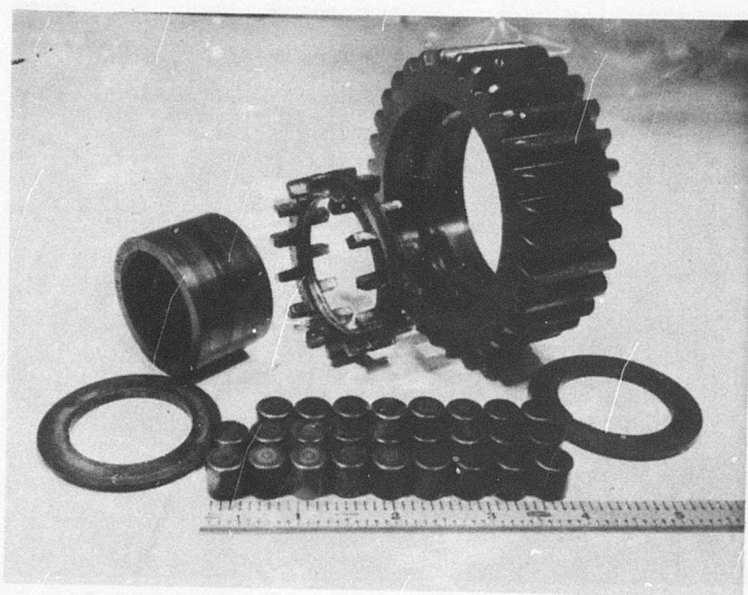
Upper planetary pinion, retainer, thrust washers, rollers, and races following 4.0-hour emergency lubrication run.
